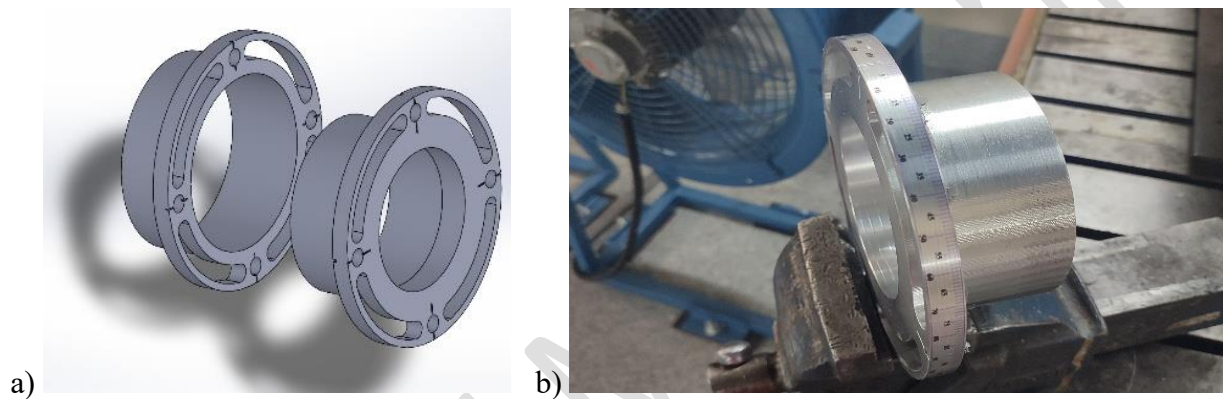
Eccentric end covers: a) SolidWorks model, b) constructed
